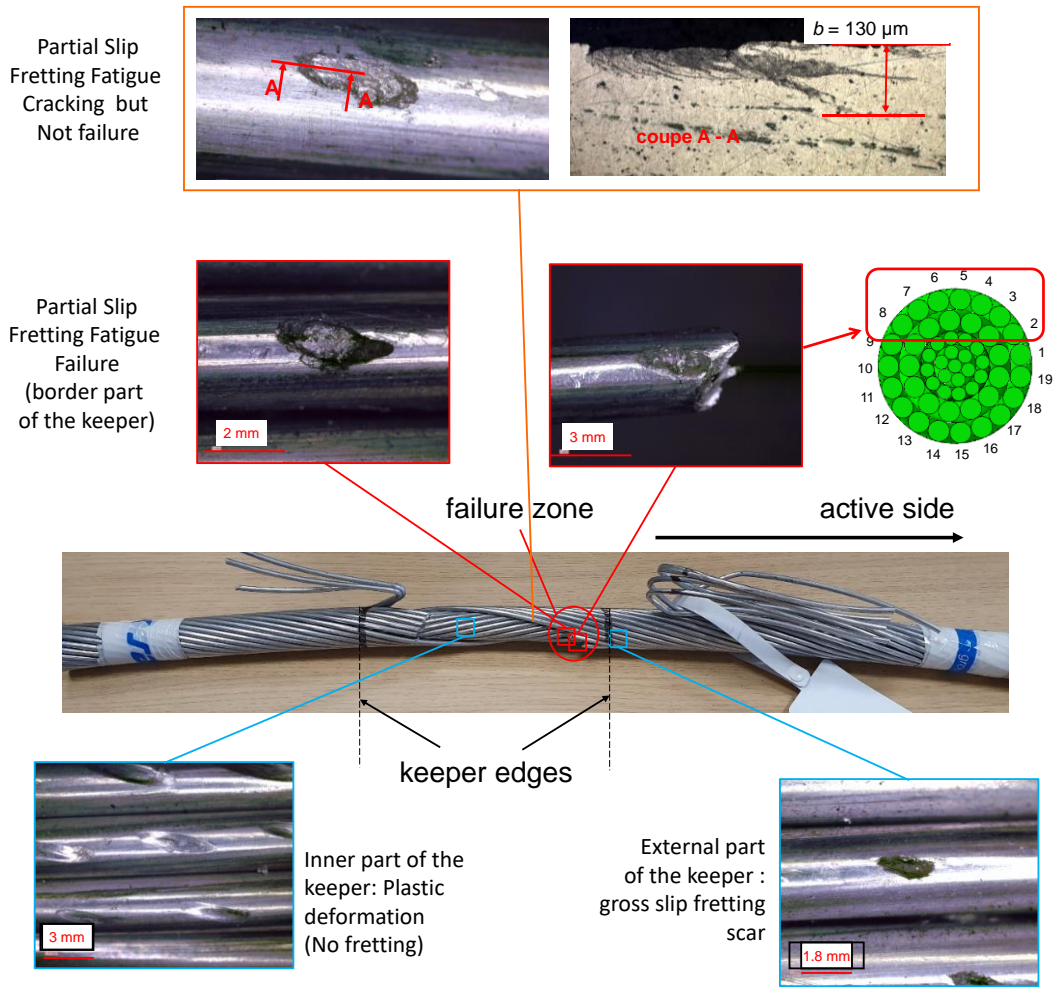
Expertise of the fretting damage of the CROCUS 412 strands below the clamping assembly.
